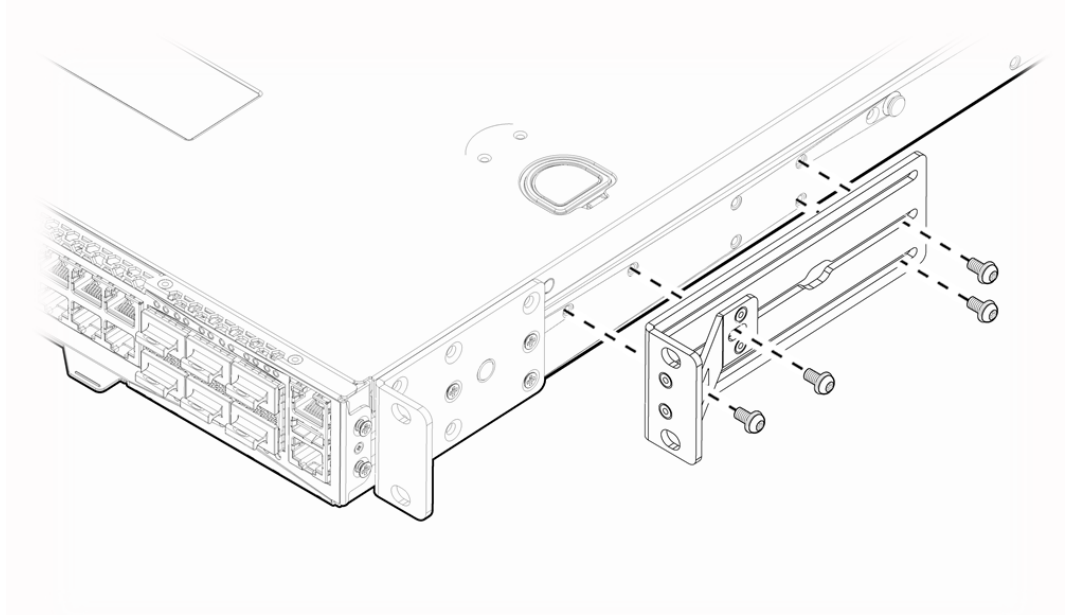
Attaching a Long Mounting Bracket: Front of Switch
